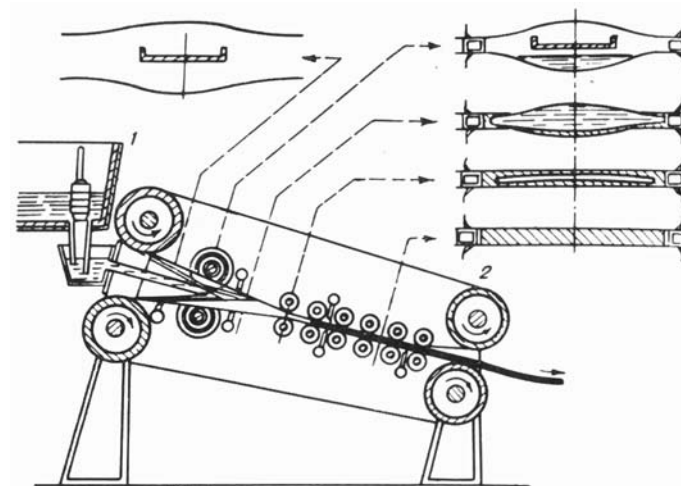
The Hazelett process for continuous casting of strip: (1) machine; (2) cross sections.
